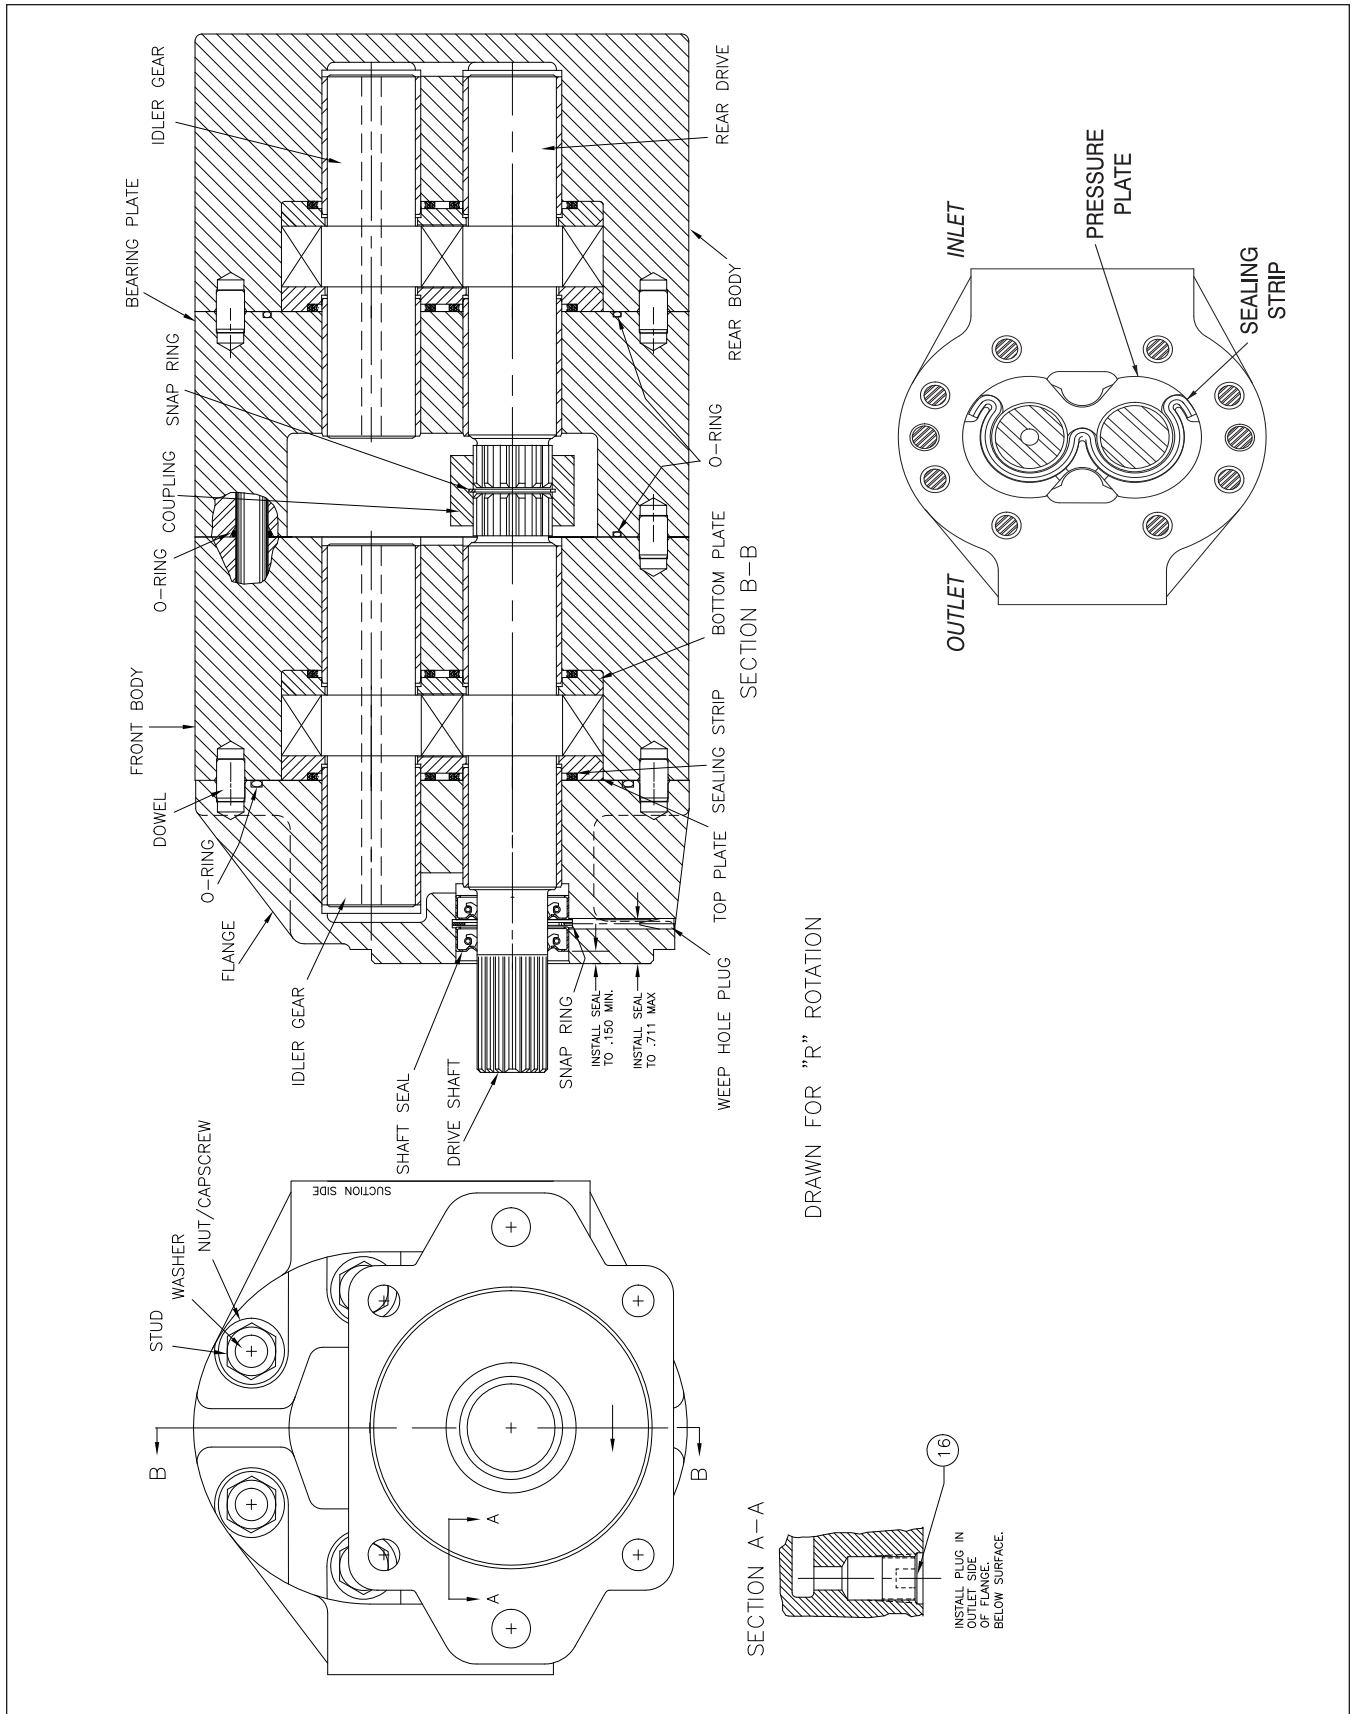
Typical Multiple-Section Pump Cross-Section
